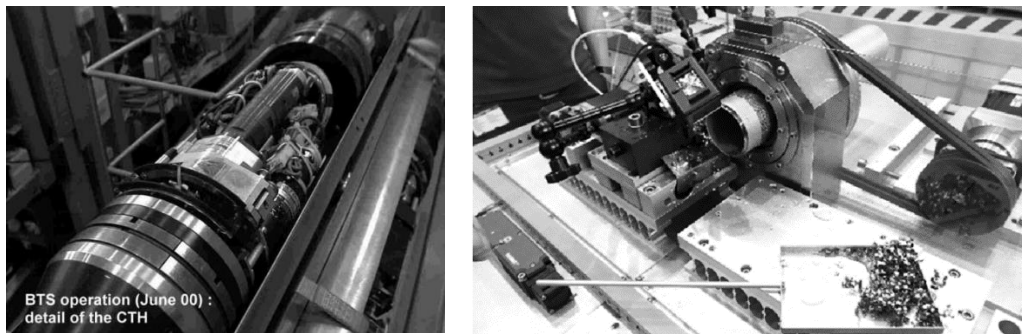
Cutting rig for ITER Divertor cooling pipe, (a) cutting tool head for 160mm straight pipe BTS and (b) orbital lathe-based cutting test bed [98]
